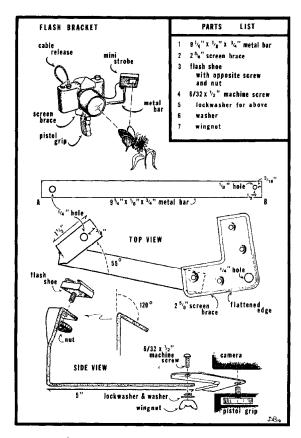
Diagram and construction details for constructing a flash bracket for macrophotography.
